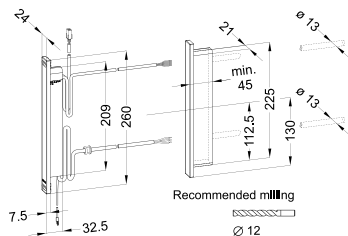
Cutting dimensions for frame power supply with spacers
